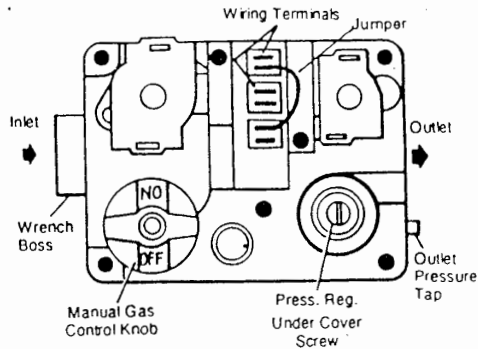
GAS VALVE (White-Rodgers 36E01)
